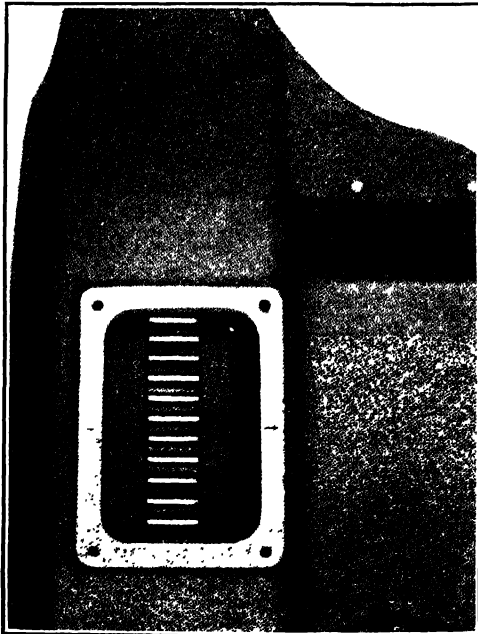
Noting Flywheel Markings through Inspection Hole in Housing.
